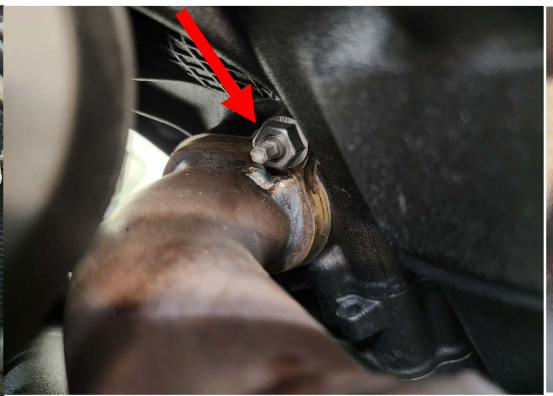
Locate the screws holding rear header pipe to the engine and remove.
